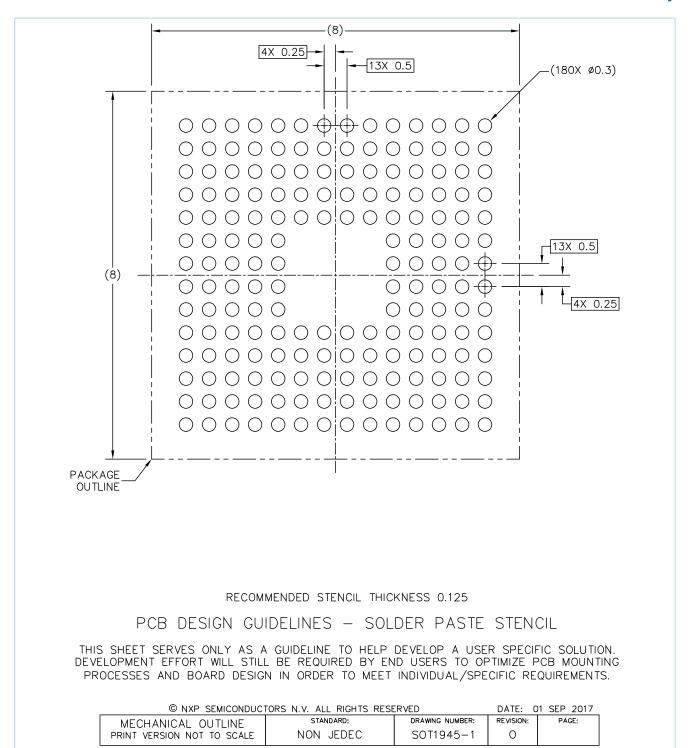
Reflow soldering footprint part3 for VFBGA180 (SOT1945-1)
